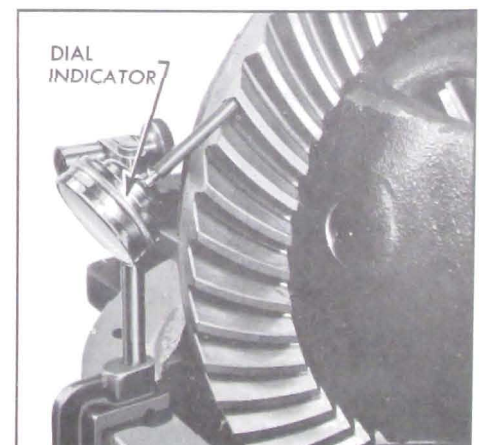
Checking Ring Gear to Pinion Backlash
